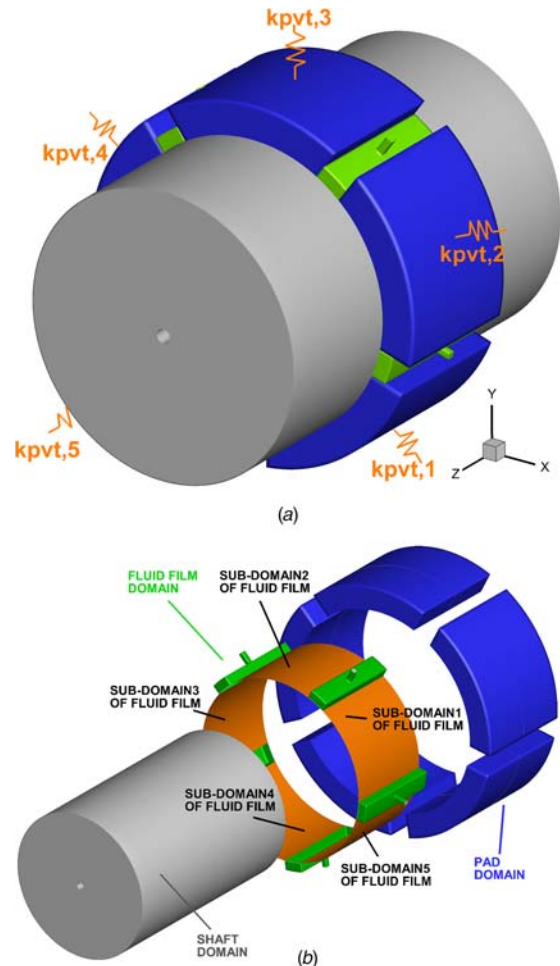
Configuration of tilting pad journal bearing model: (a) overview and (b) exploded view
